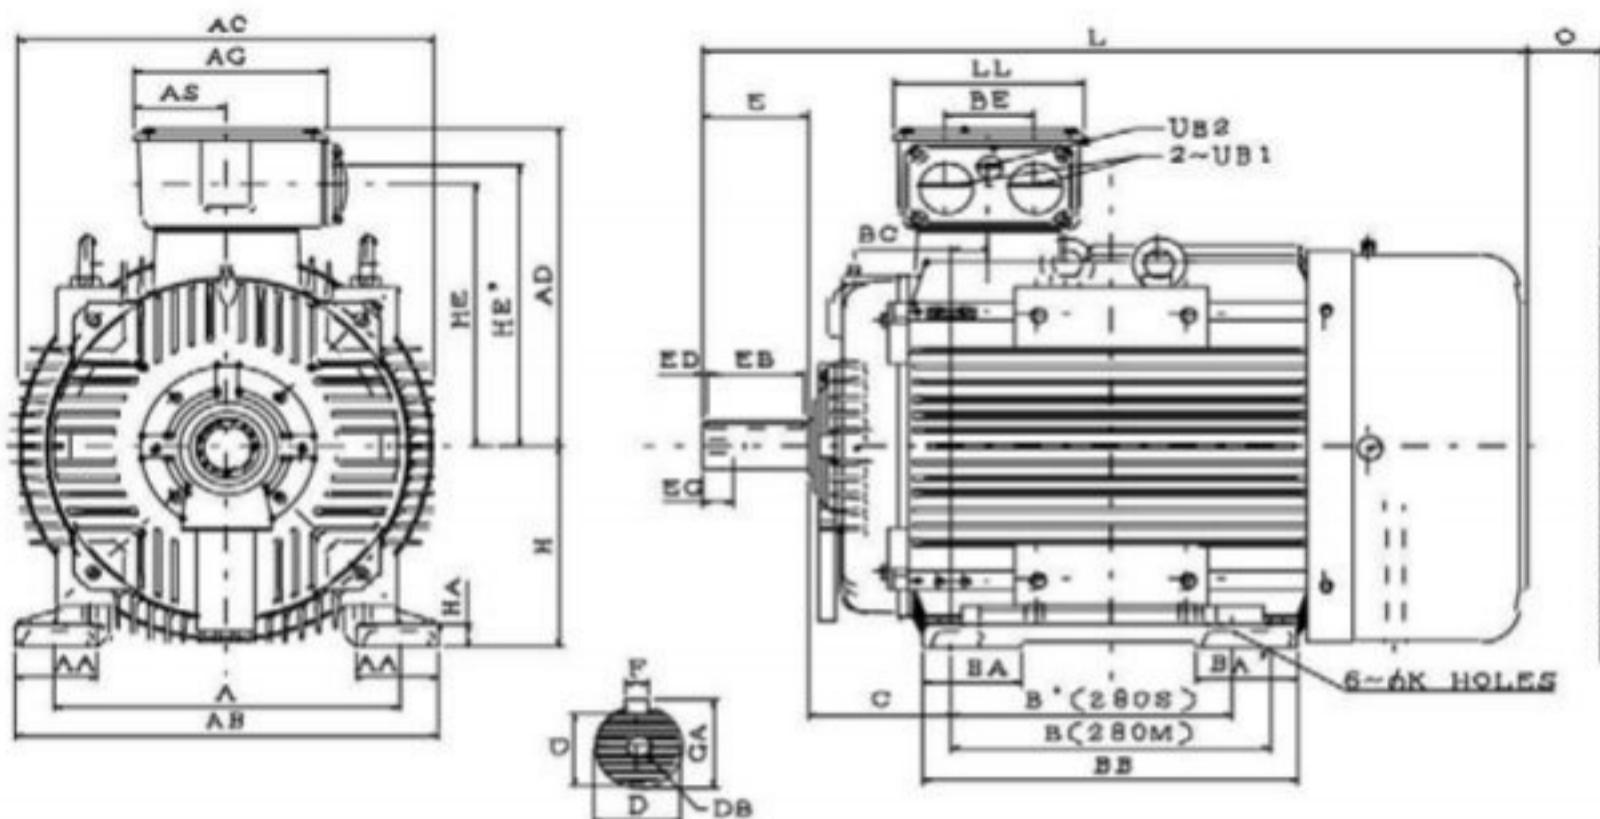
Outline drawing of cast iron design, feet version, mounting B3; frame size 280
